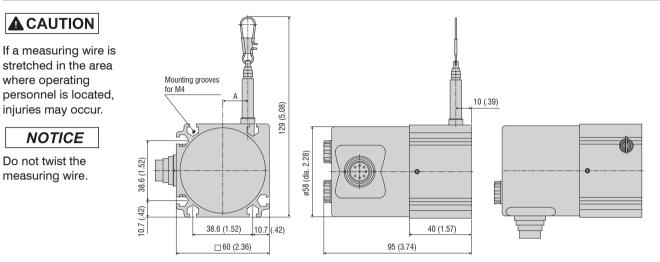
Dimensional drawing WDS- ... - P60 - SR - U/I, dimensions in mm (inches)
